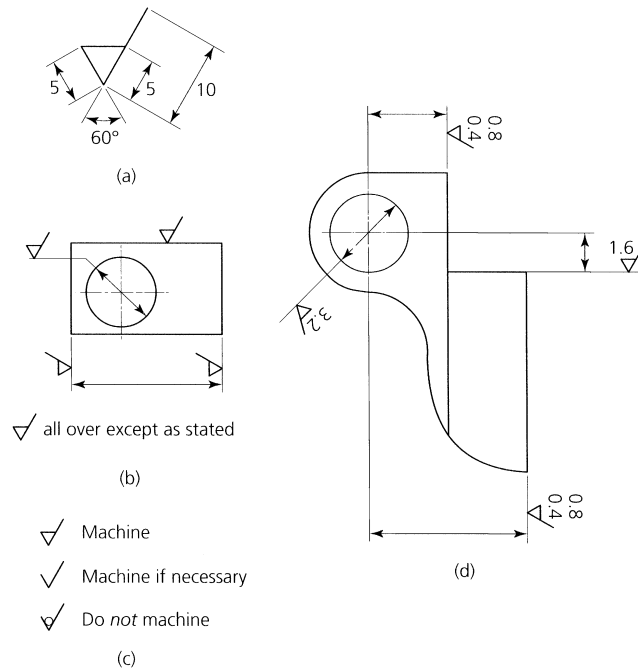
The machining symbol: (a) drawing a machining symbol; (b) applying the machining symbol as an instruction; (c) machining symbols; (d) specifying surfaces texture on a casting – dimensions omitted for clarity
